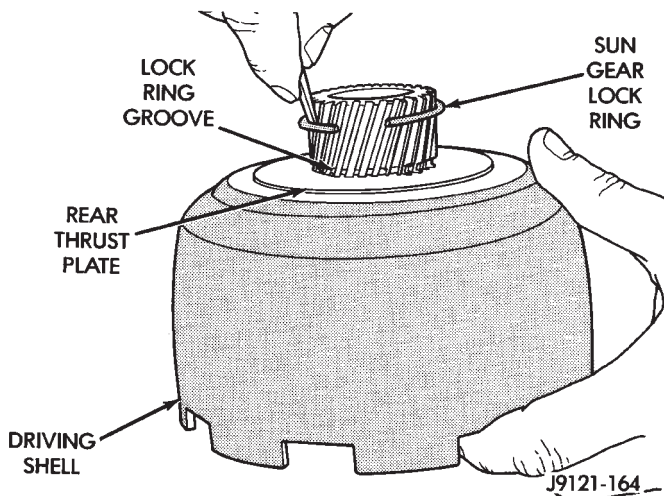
Installing Sun Gear Spacer (42RH)
